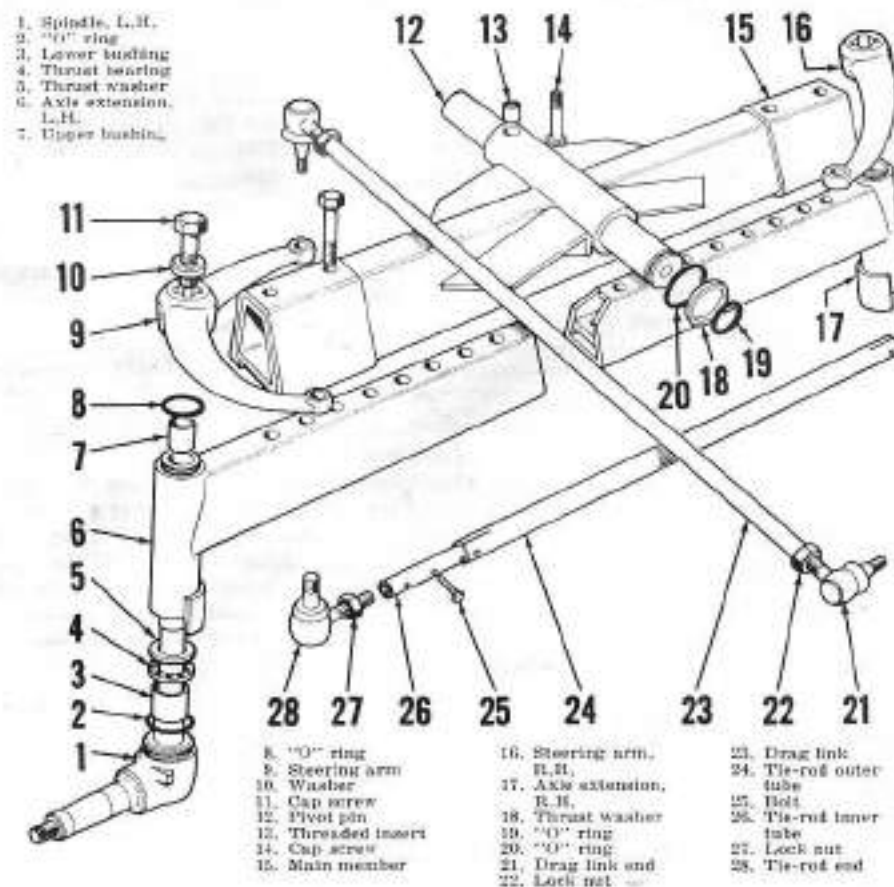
Exploded view of model 1200 front axle. Models 880 and 990 (except model 990 heavy duty axle) are similar.
